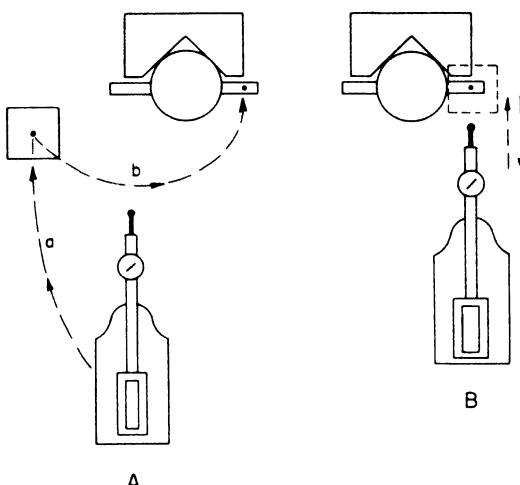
(A) Possible positions of work-piece, gage block stack and height gage. (B) For more accurate measurements, gage block should be placed close to the work as shown so that height gage movements are short.
